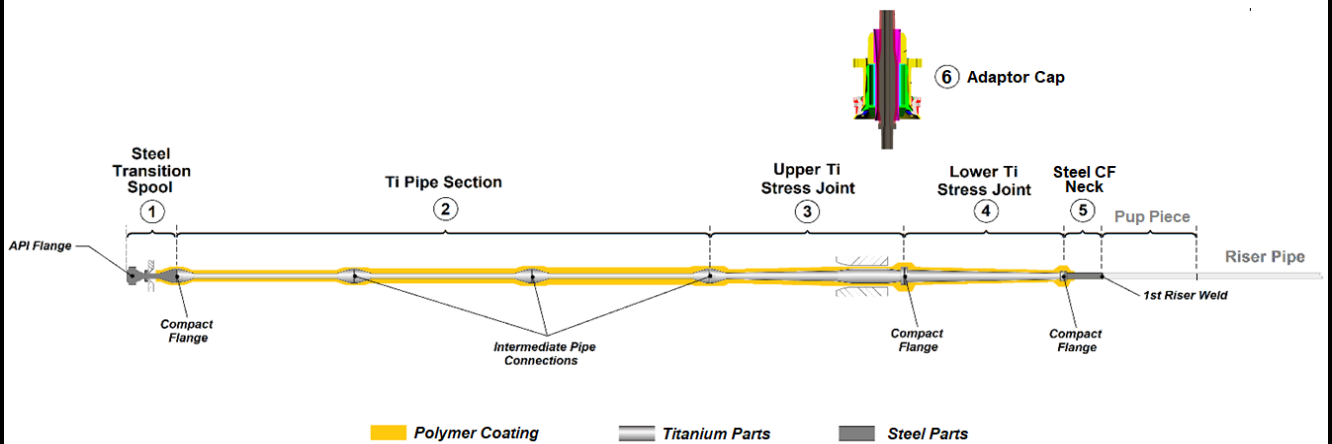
Schematic View of the Titanium Stress Joint Assembly and its Main Parts.
